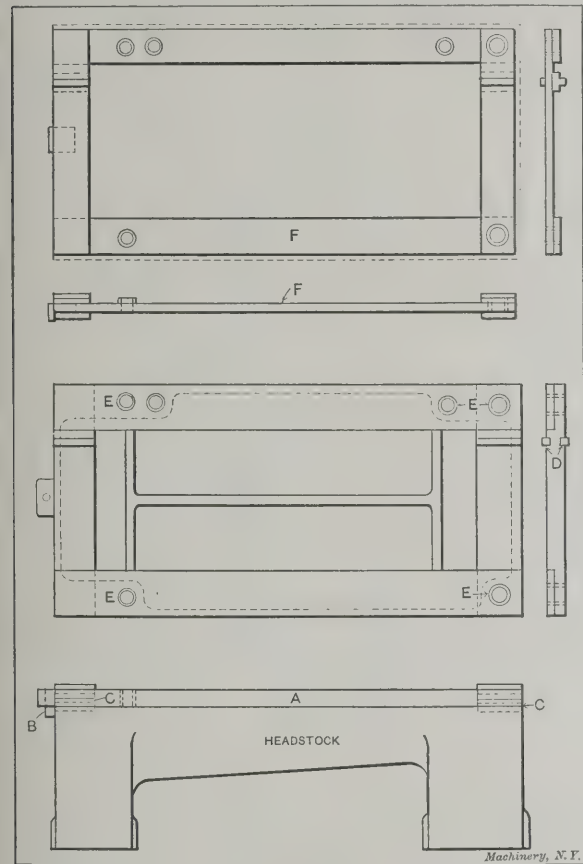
Application of a Wooden Jig for Drilling a Lathe Headstock. At *F* is shown a Similar Jig constructed of Flat Bar Steel
